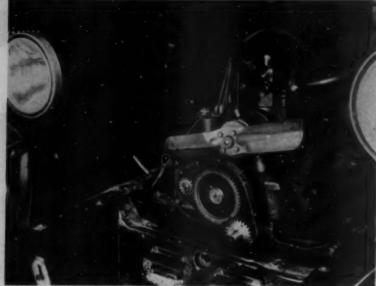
Four gear front-end drive train with nonmetallic idler. Fig. 3. Two gear front-end drive with laminated cam shaft gear. Fig. 4. Pinion and center section of gear at the left have been in operation for 16 years on a key seater
